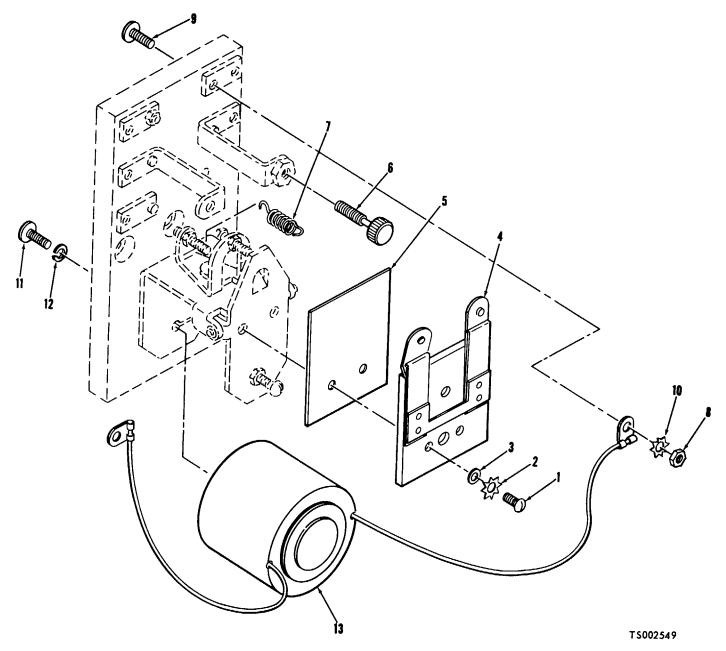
Relay Part No. Exploded View 69331-1R. 6-29
